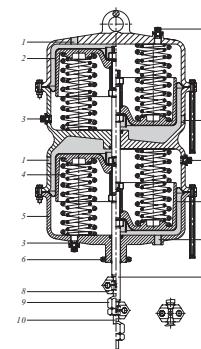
· Tandem actuator with 2 x 2800 cm²
